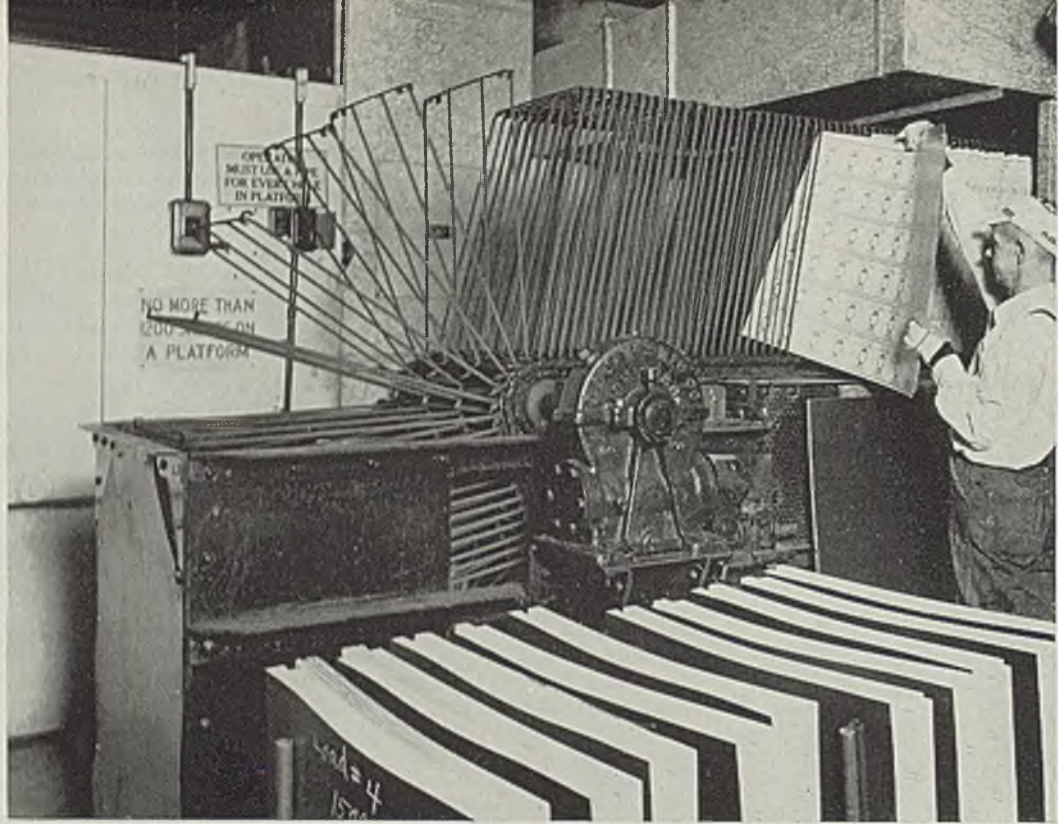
Discharge end of the lithographing oven showing tinplates as they are being removed from the conveyor belt after leaving the cooling section
